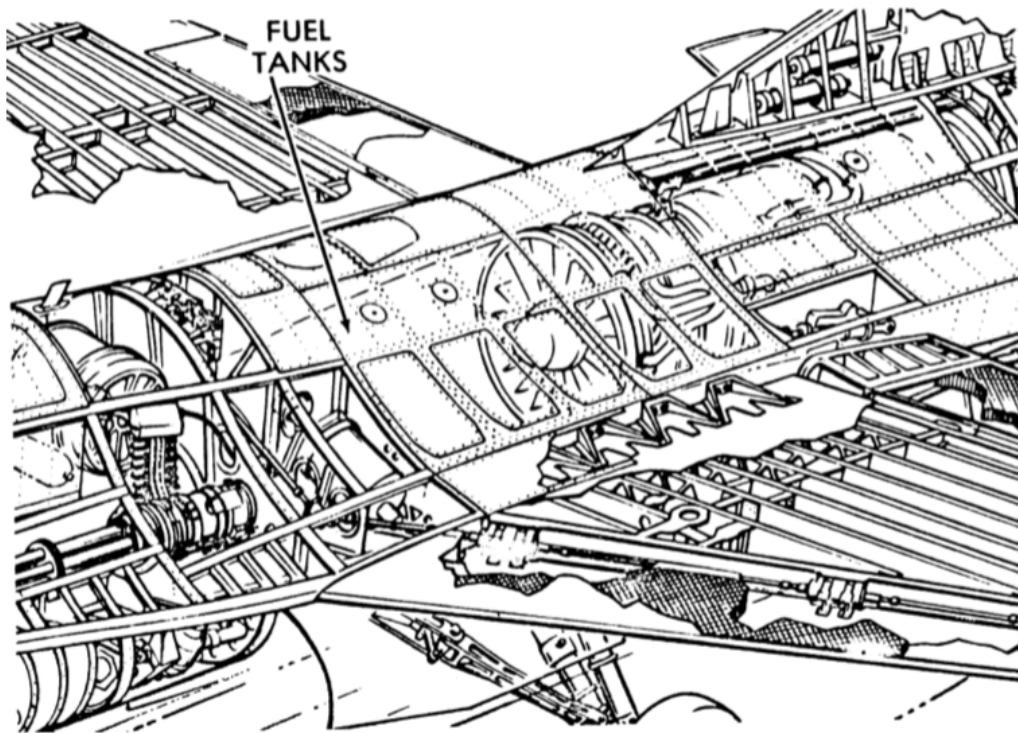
Large access doors in Zone 2A over fuselage integral fuel tanks.
